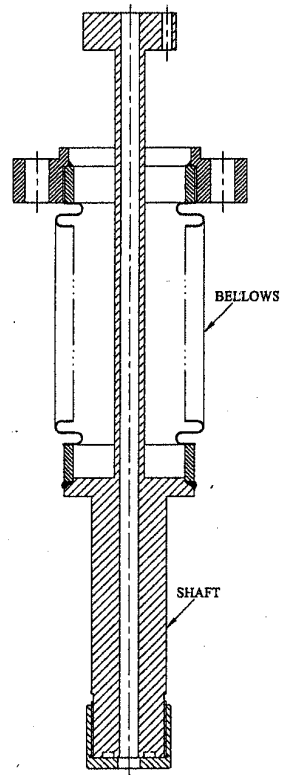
Typical assembly of the shaft with the bellows and flange [4]
